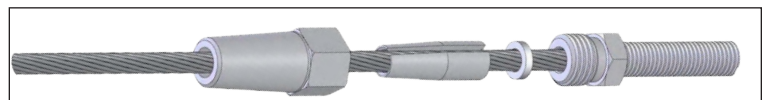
Figure F. Insert the cable into the receiver cone, wedge and spacer until it is fully seated in the threaded stud.
